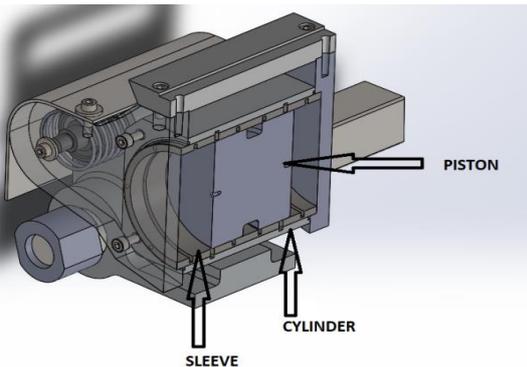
Cut CAD Model of Piston Cylinder and Sleeve Arrangement
